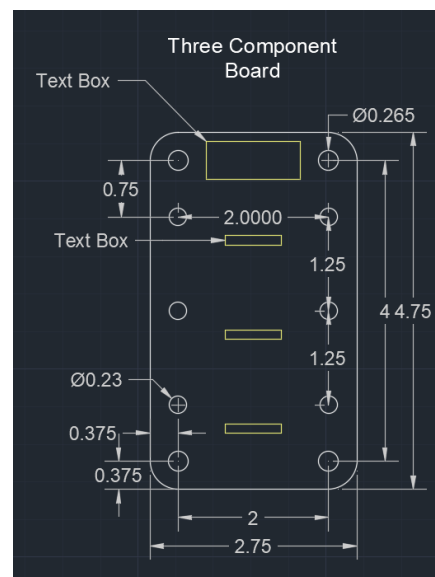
AutoCad Drawing for a Three Component Board with text boxes
